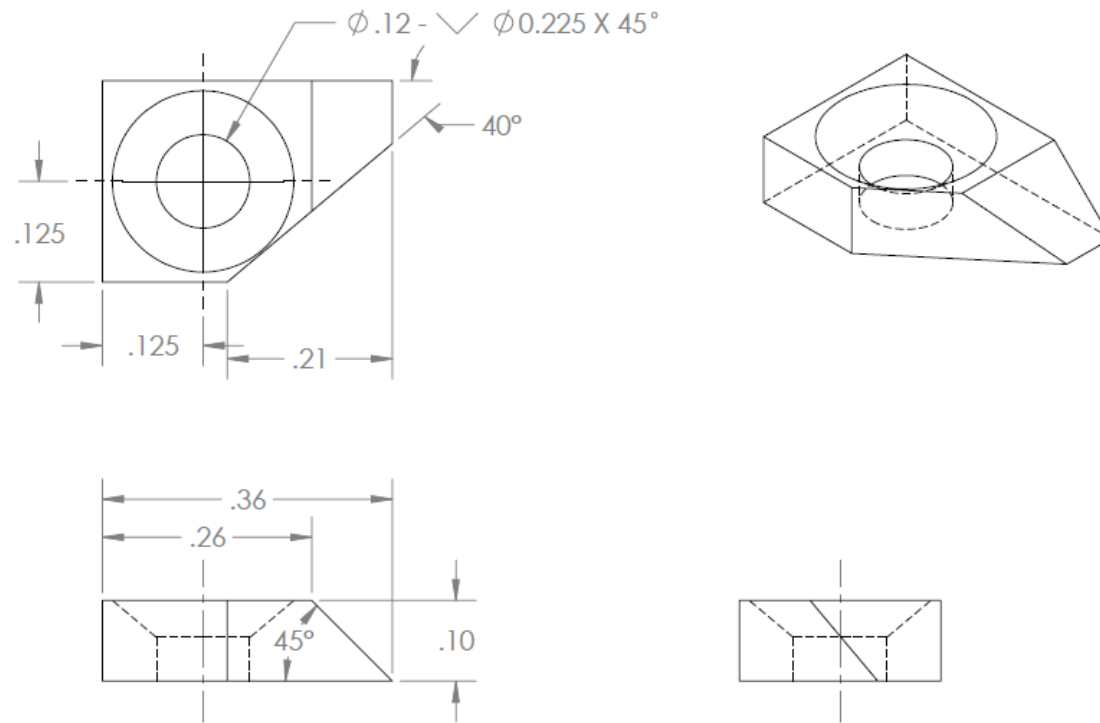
Grit Clamp Dimension Drawing: Units are in Inches
